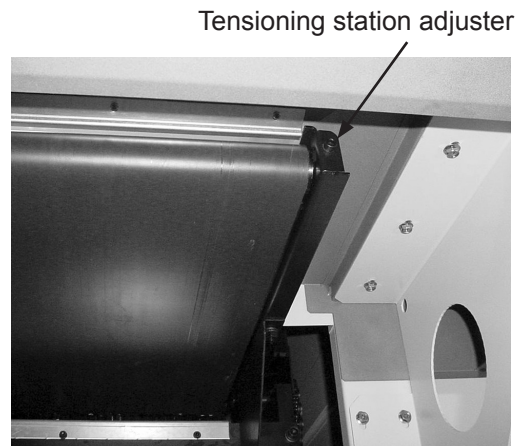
Underside View of Feed Table and Infeed Conveyor
